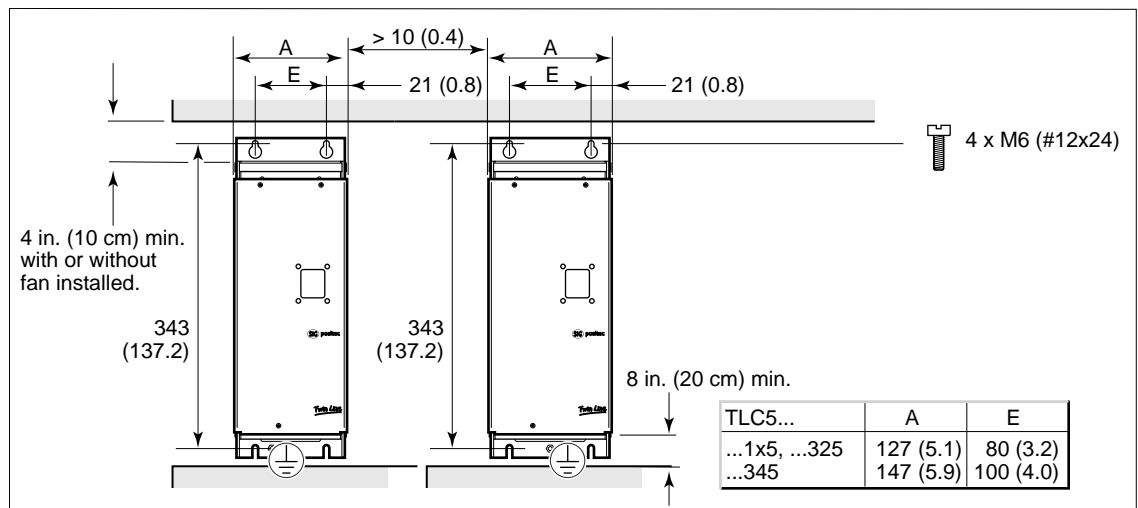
Mounting distances, dimensions in mm (in.)
